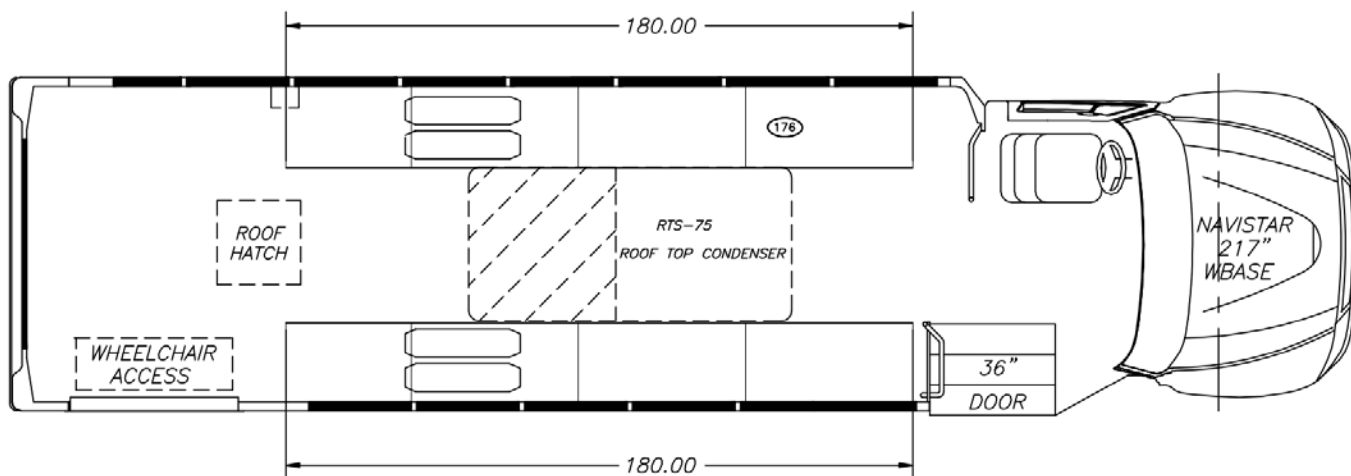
Current International El-Dorado Floor Plan. Wheelchair access door would need to move to back of bus to accommodate loading surf boards
